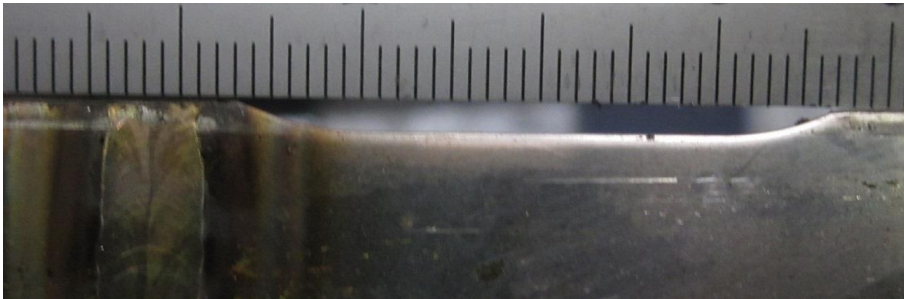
1.7mm profile with optimised weld relief-cut
